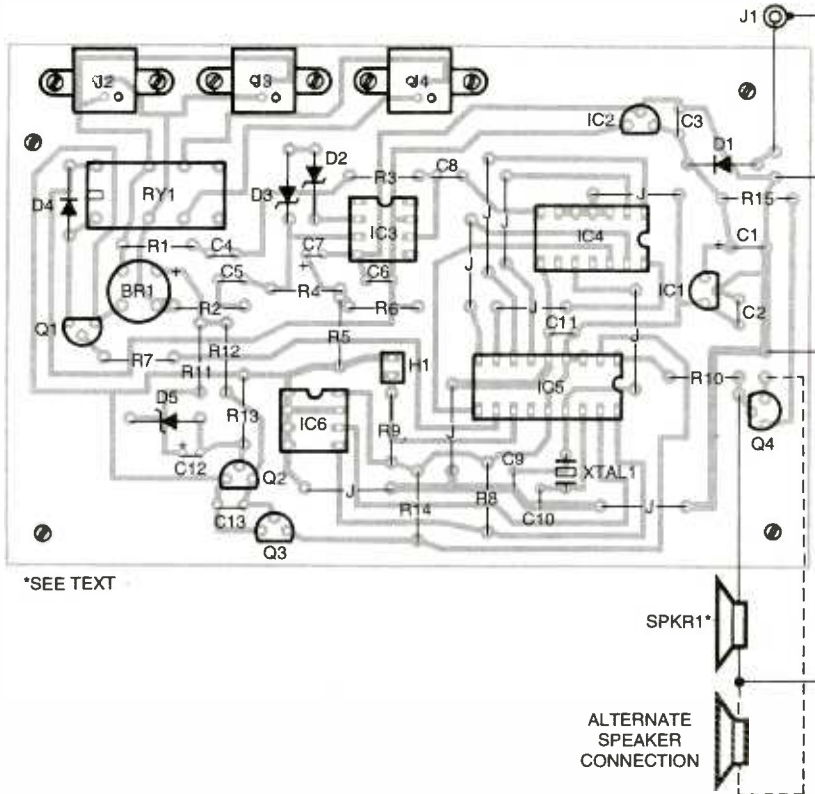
Call Alert can be assembled using the construction method with which you are most comfortable; for ease of construction, it is recommended that the project be assembled on printed-circuit board. Here is a full-size template of the layout on which the author's unit was assembled.
